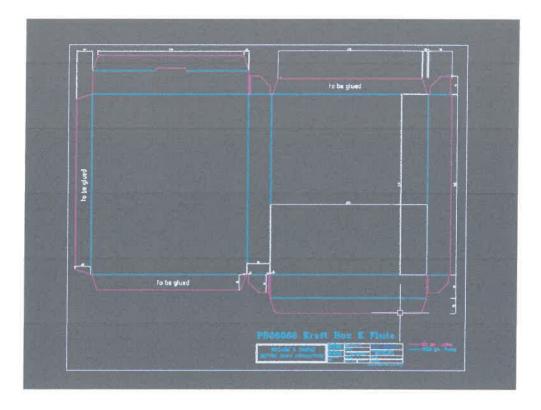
Drawing of 8R Photo frame Box in AutoCAD
